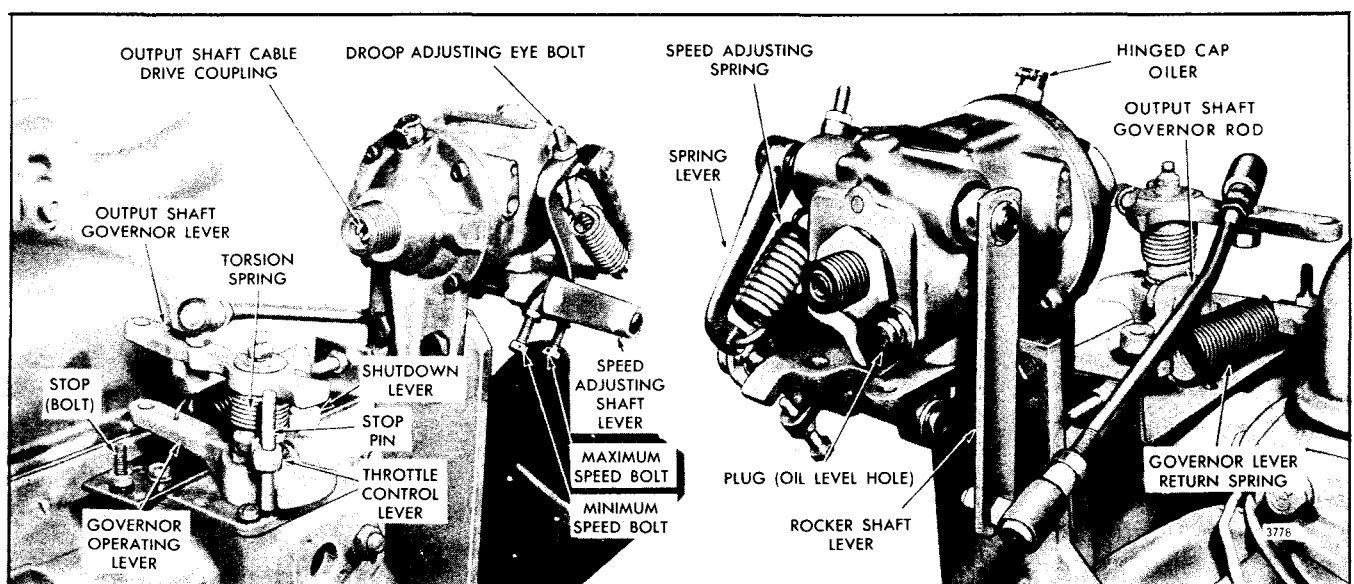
Flexible Shaft Driven Output Shaft Governor and Linkage
